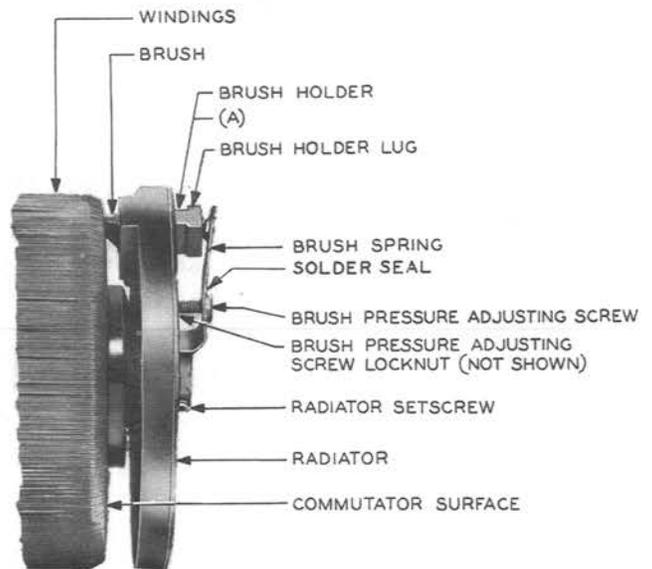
KS-5657 Autotransformer Having External Spring Brush Assembly
